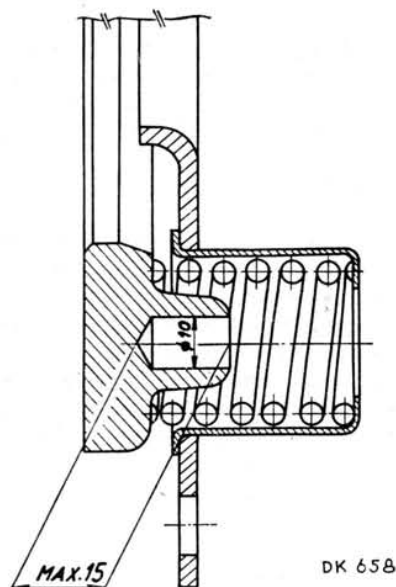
/2 - Clutch Balancing - Maximum Dimensions of Bores in Pressure Plate
